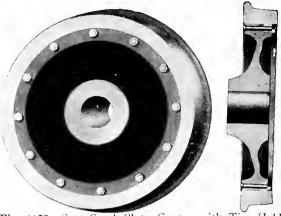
Cast Steel Plate Center with Tire Held by Shrinkage and Bolts.
